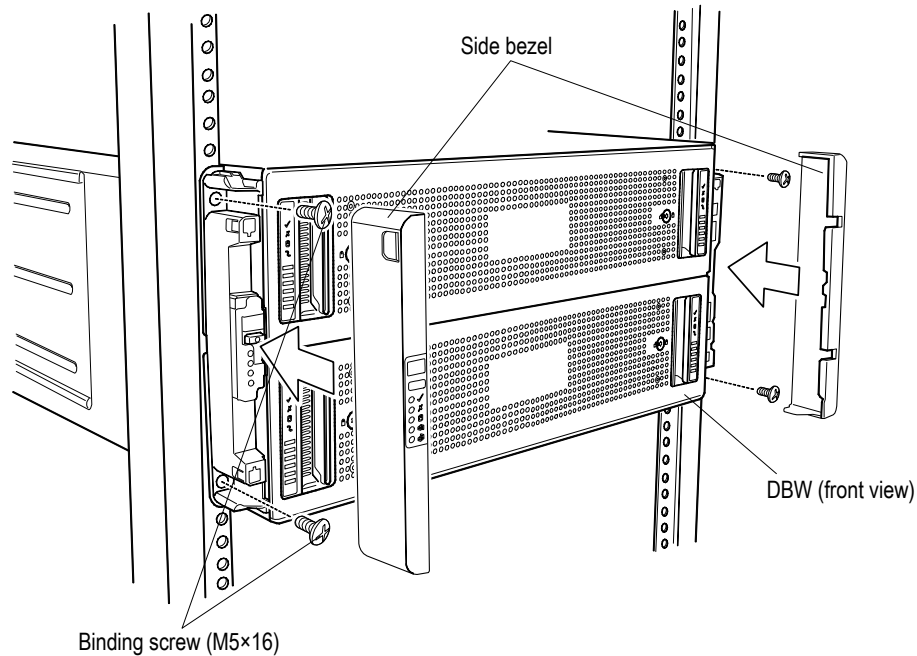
Fixing the Front Side of the Array (Drive Box (5U))
